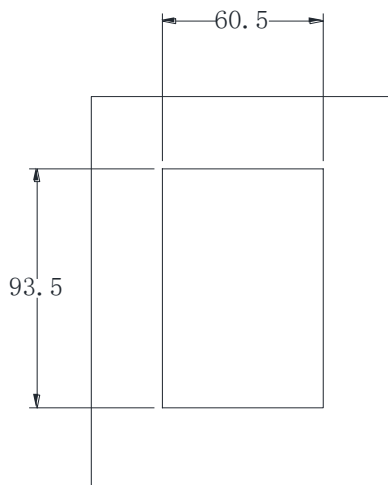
Mounting hole dimension of outer keyboard with tray
